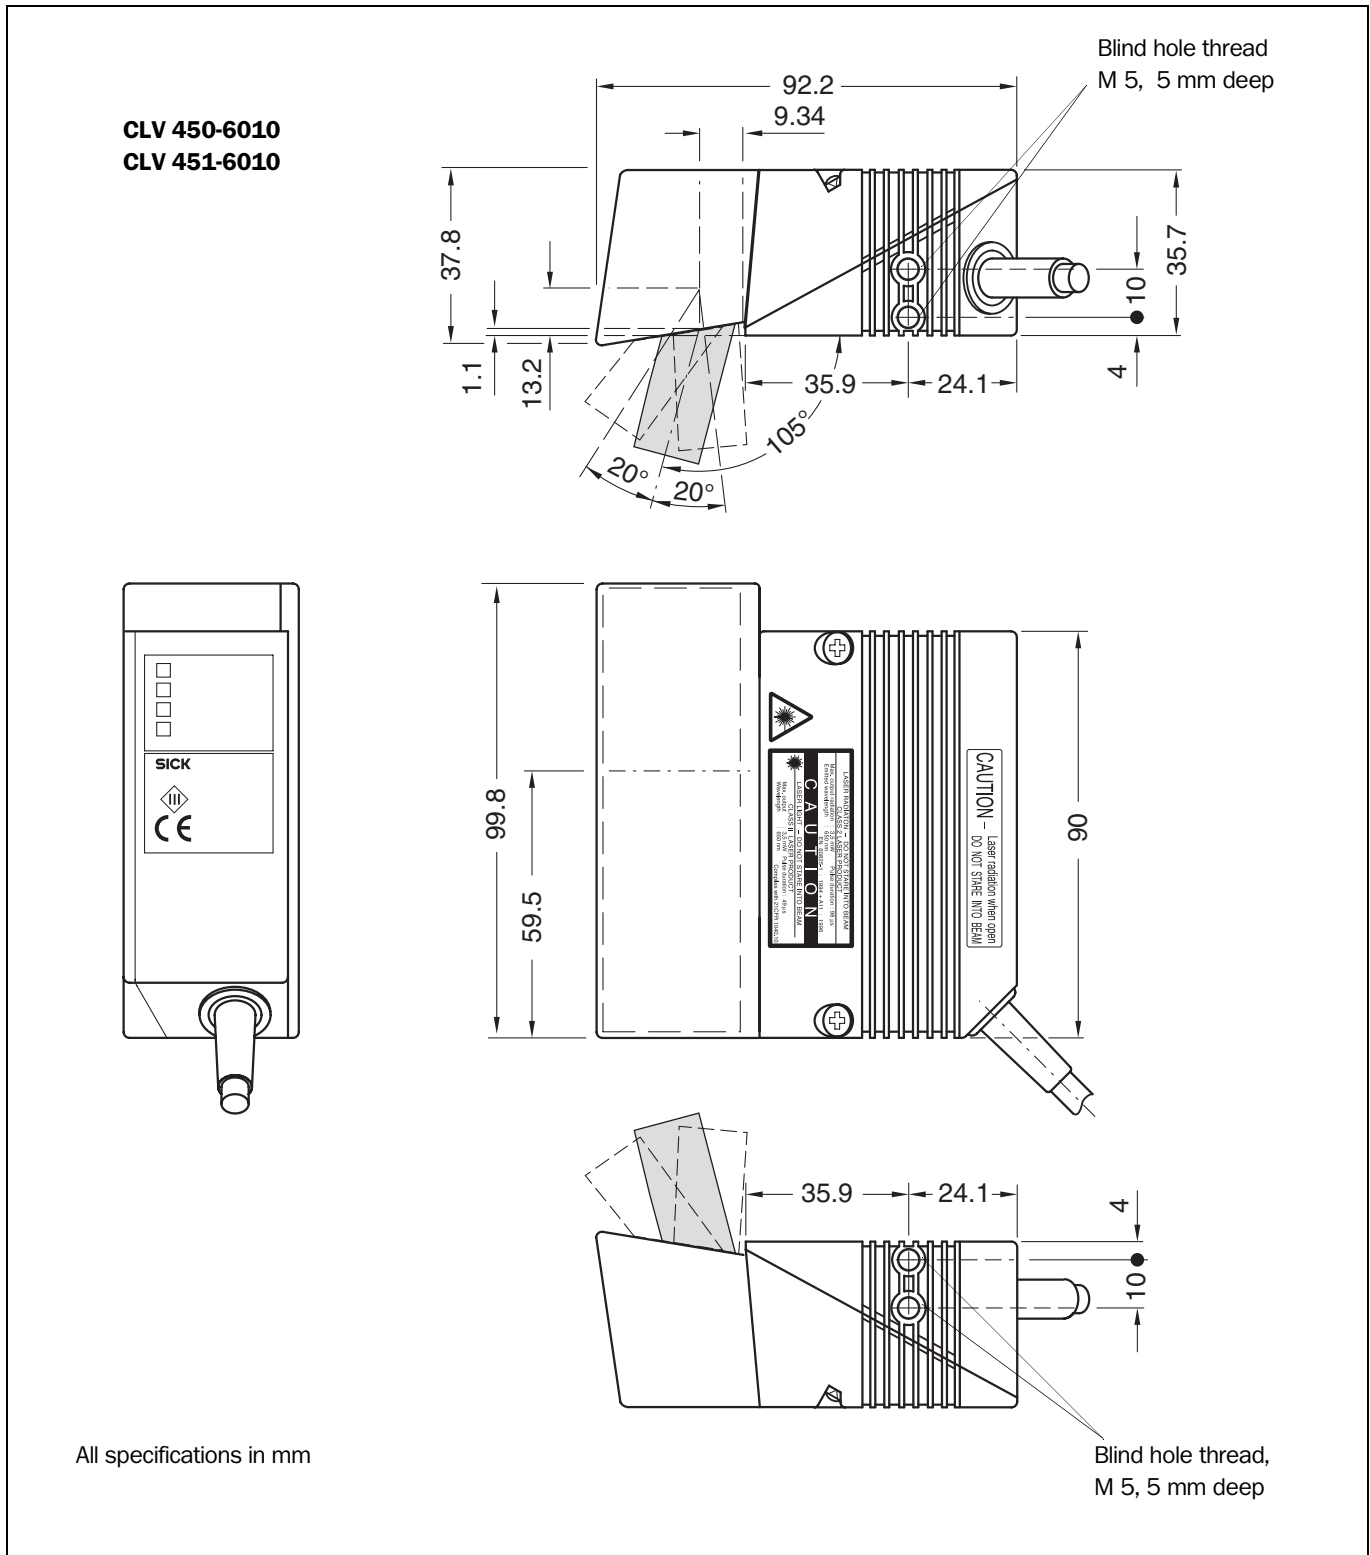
Dimensions of the line scanner with oscillating mirror
